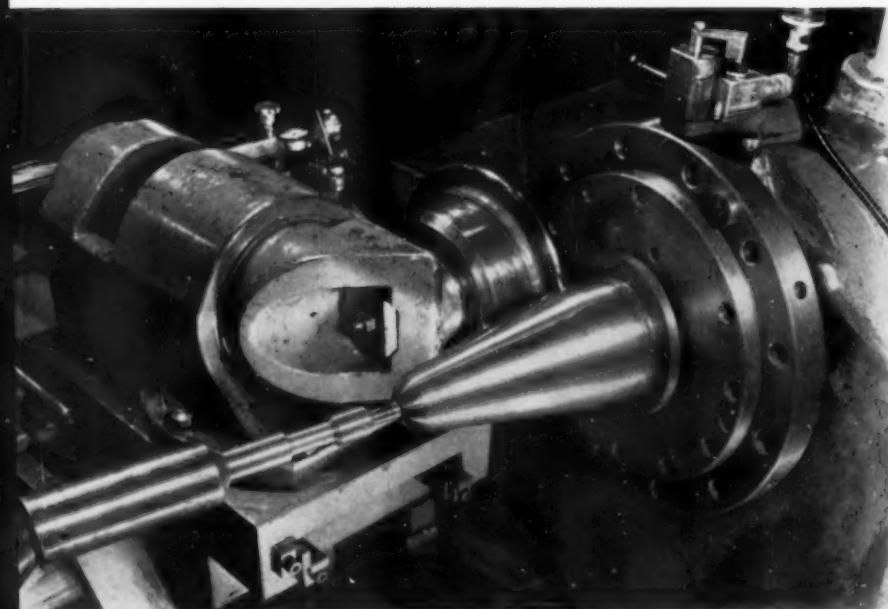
Ceramic tool used to machine high-temperature, high-strength alloy. The tool fractured after three linear inches of travel at 50 fpm.
